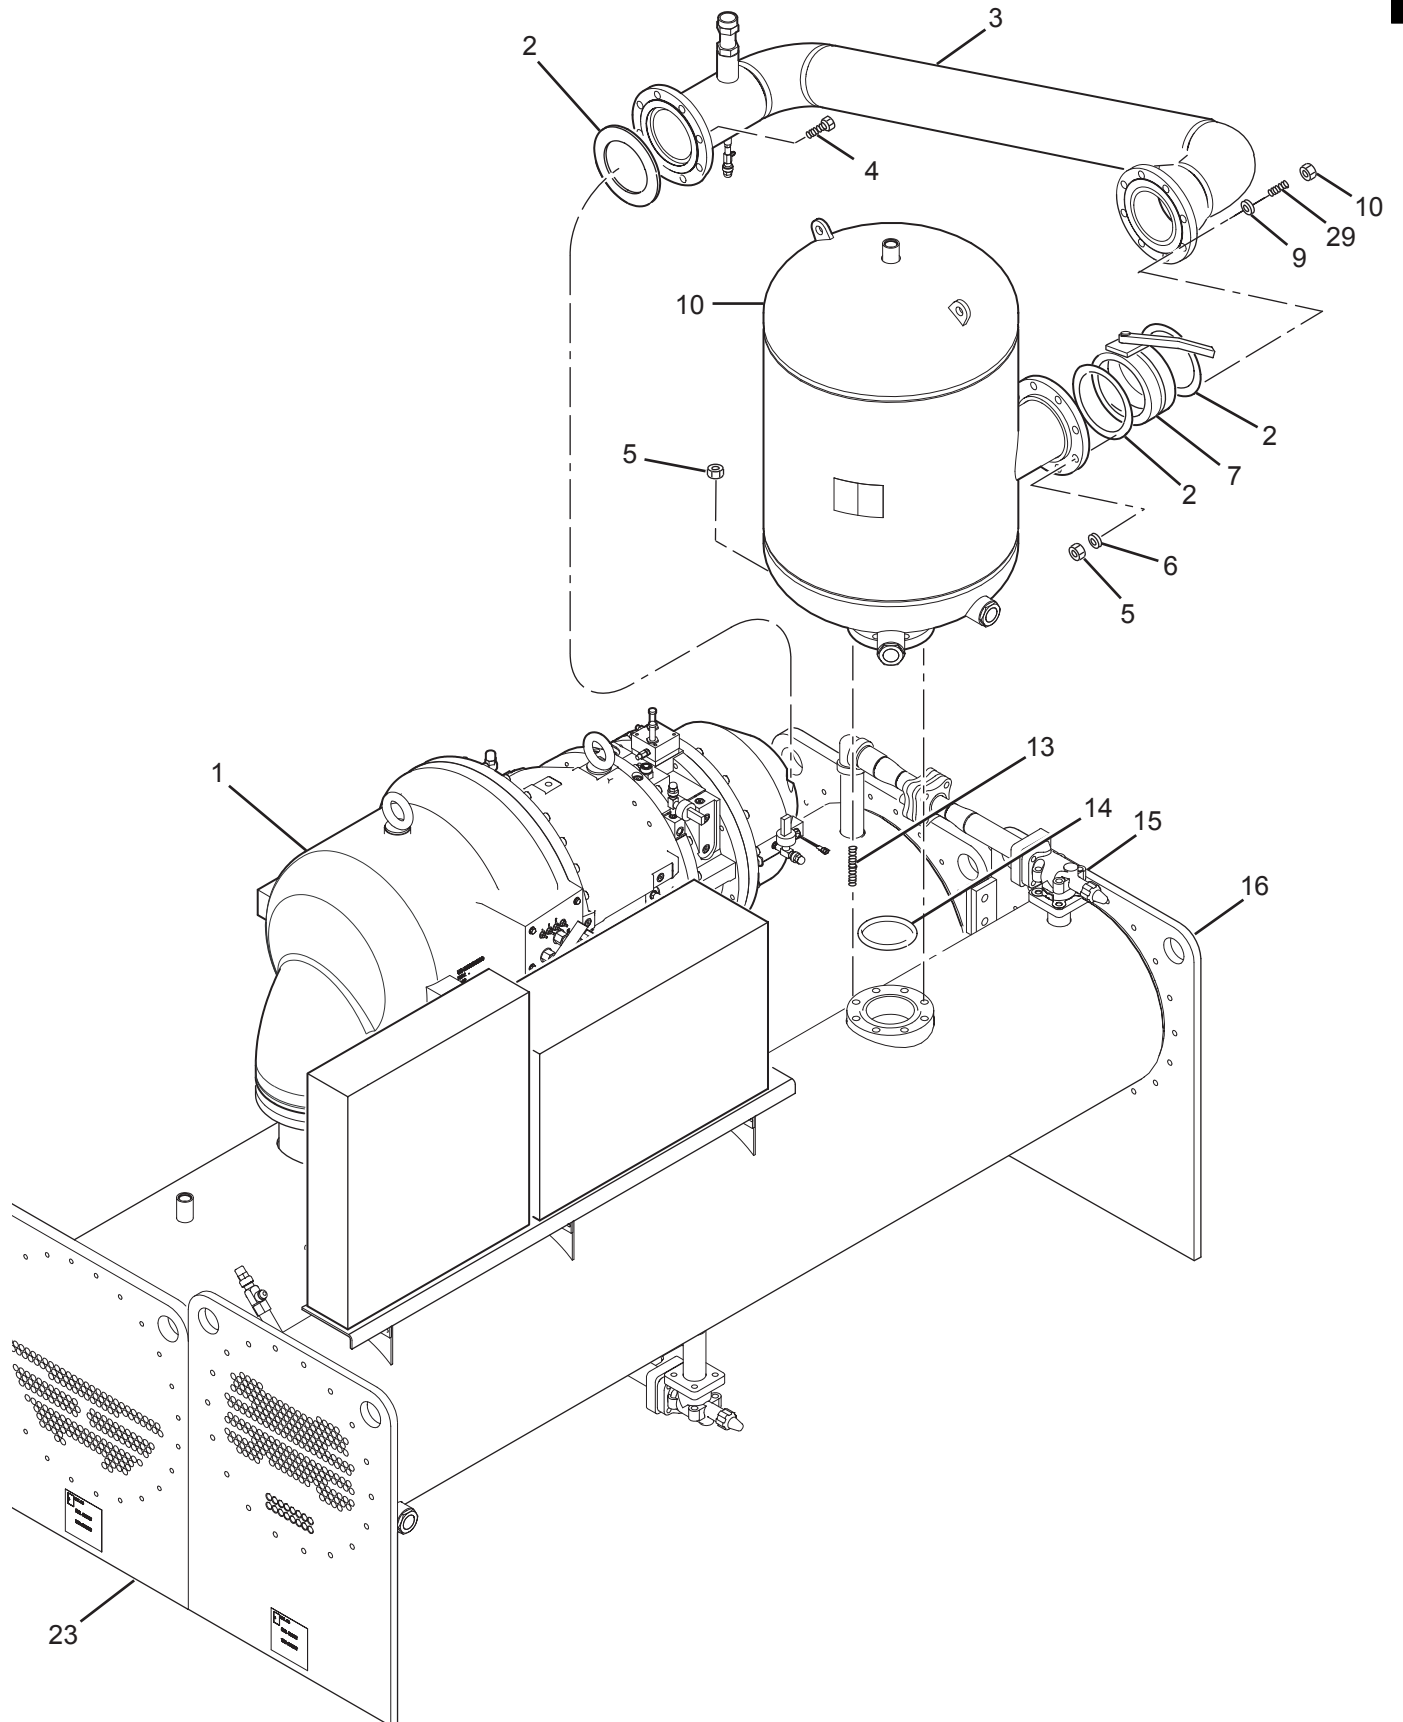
FORM 8 FIELD ASSEMBLY – EXPLODED VIEW
